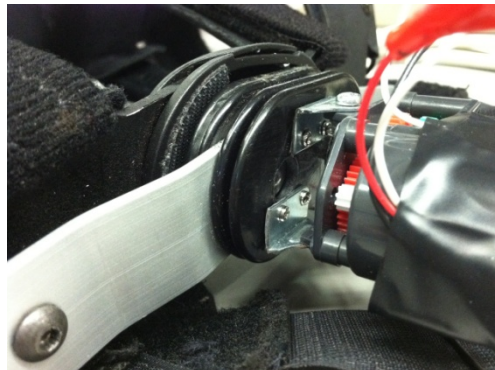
Transmission Attachment Depicting Alternative Screw Attachment Method
